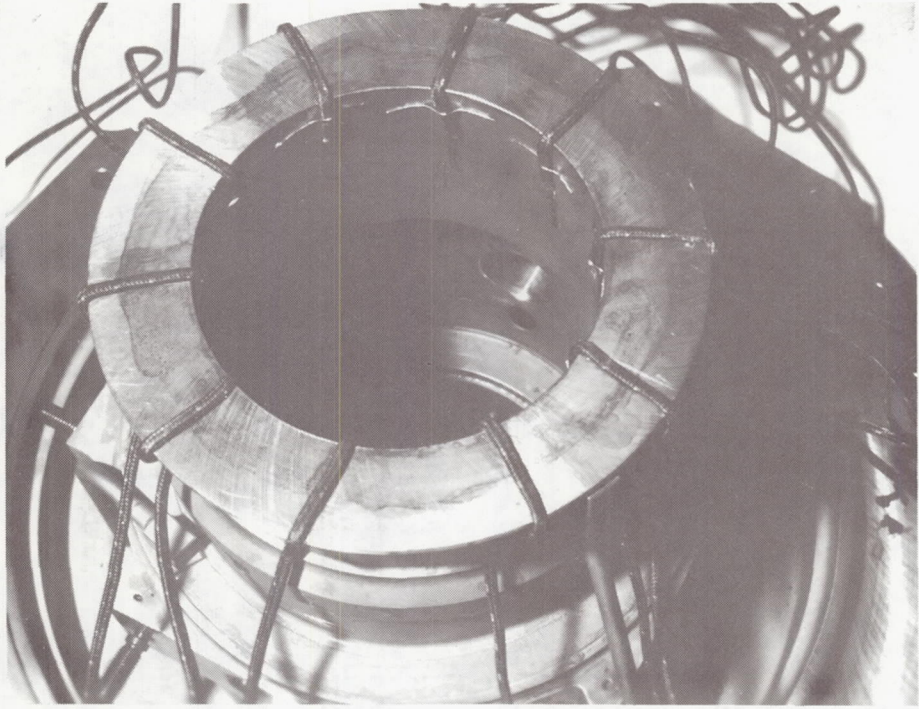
Thermocouple Installation in Journal Heat Exchanger (X-24304)
